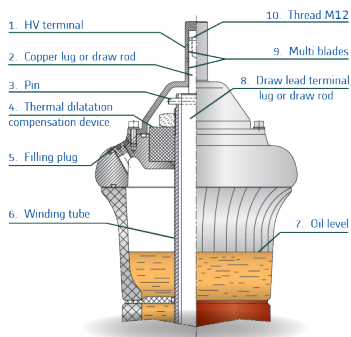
H1 head type (Draw lead or draw rod up to 170 kV)
